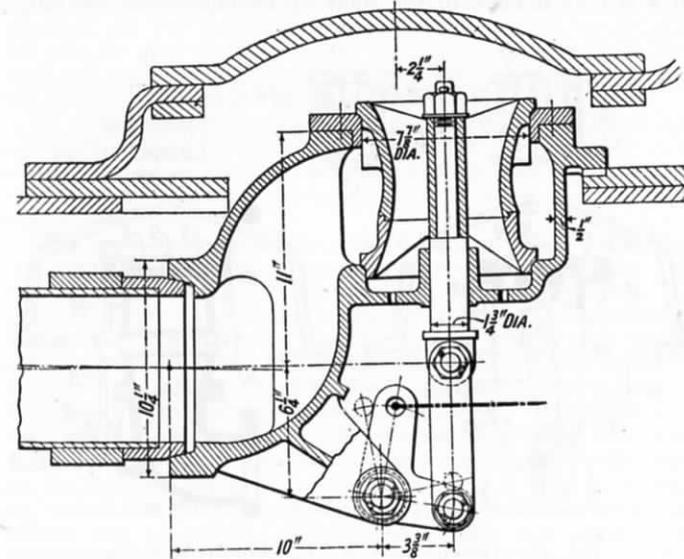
L.N.E.R. BALANCED REGULATOR VALVE.
